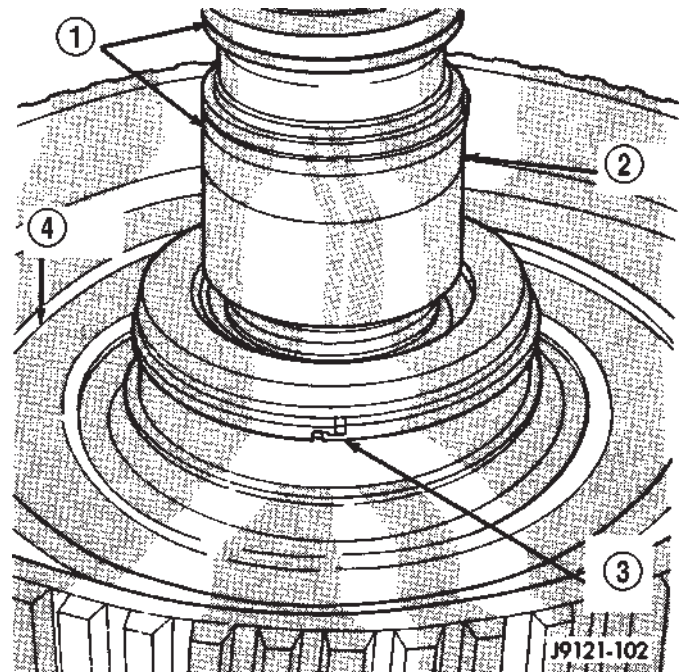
Input Shaft Seal Rings And Thrust Washer
